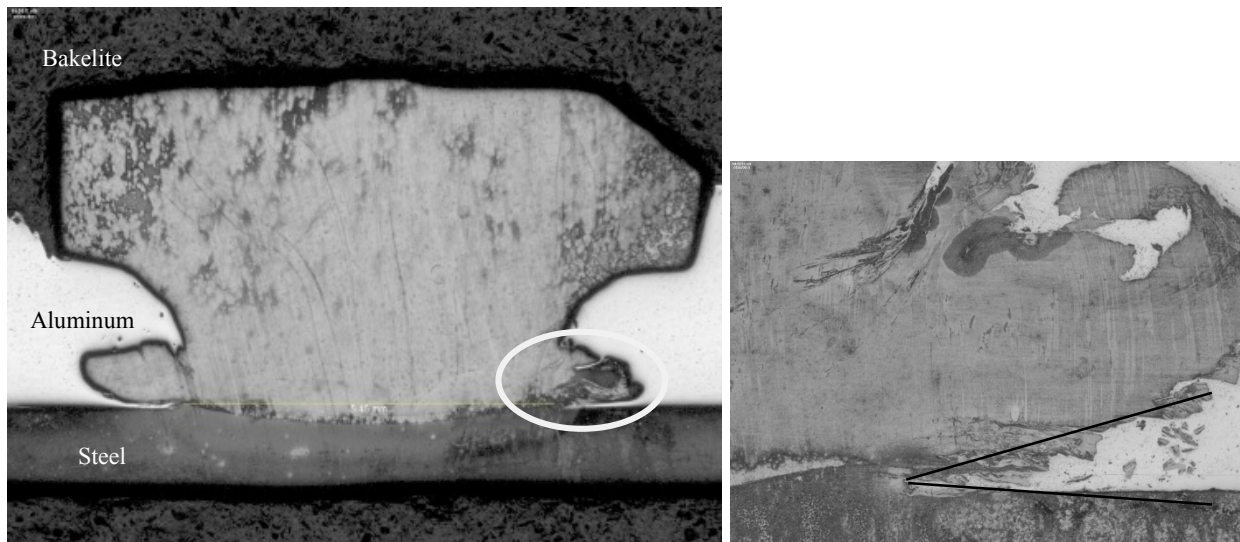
Lap-Shear Specimen Cross Section and Detail View of Right Side
